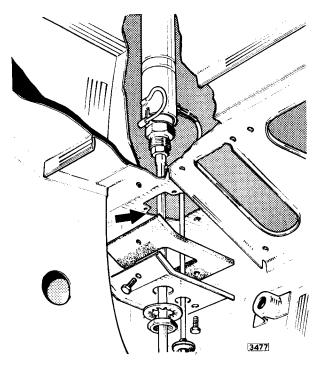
Fitting the aerial—the arrow indicates the shaped hole in the inner scuttle panel.
